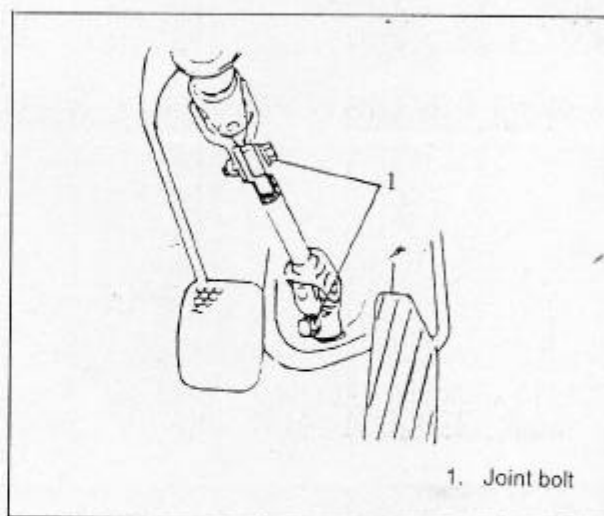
C — 10 REMOVING STEERING SHAFT JOINT
